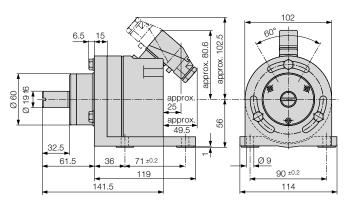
KINAX WT 707 with additional gear, screw terminals and cable glands.
